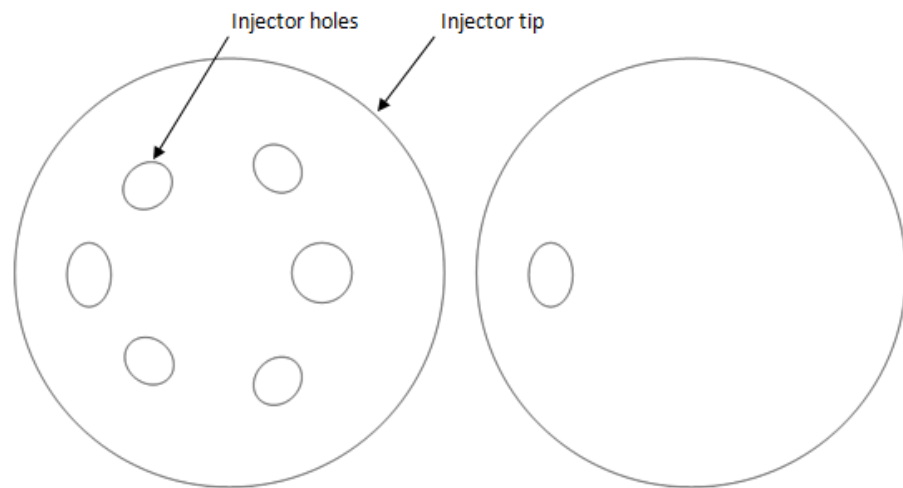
Schematics of the direct injector tip before (left) and after (right) laser welding with the hole at "9 o'clock" left open.
